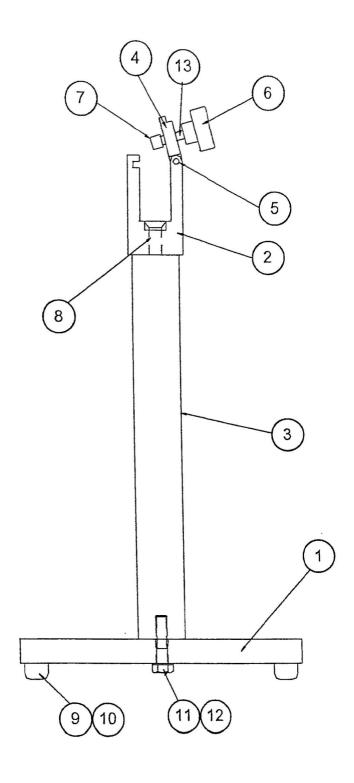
POWER CRIMP STAND ASSEMBLY - DWG-A19006-1
